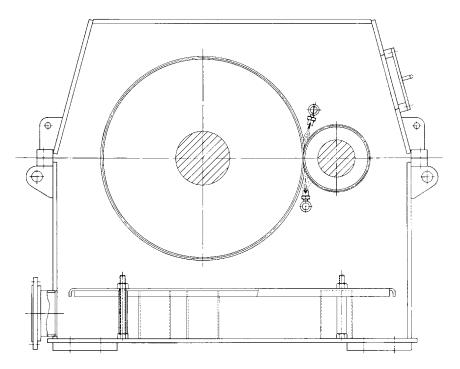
End cross section, typical industrial gear. (Source: Demag Delaval.)
